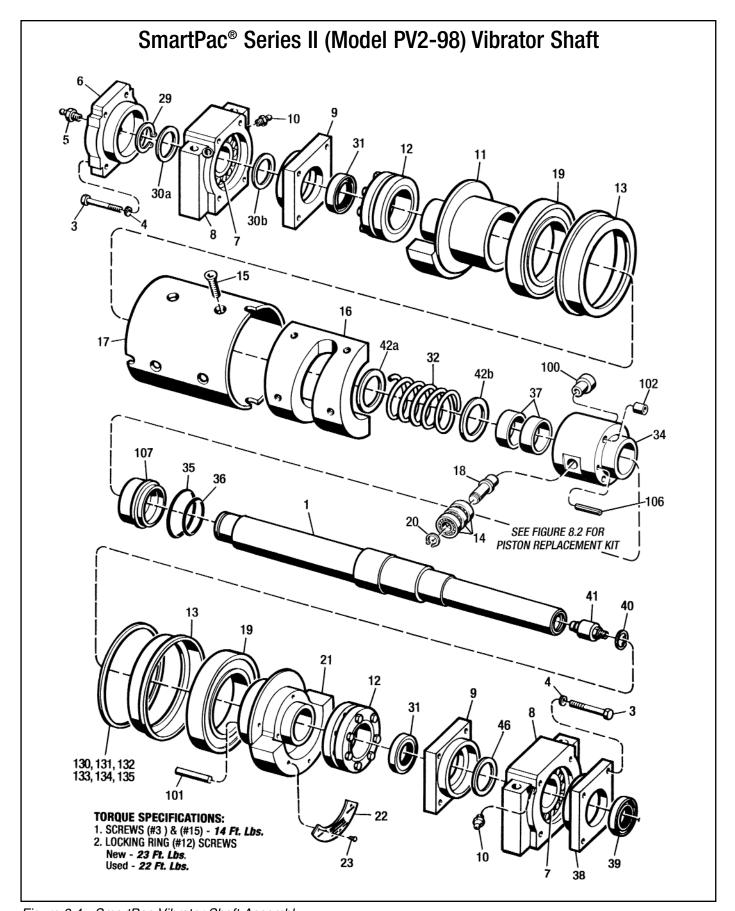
SmartPac Vibrator Shaft Assembly
